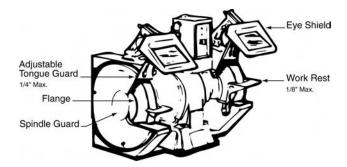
C. Positioning the Tool Rest on a Grinding Wheel
